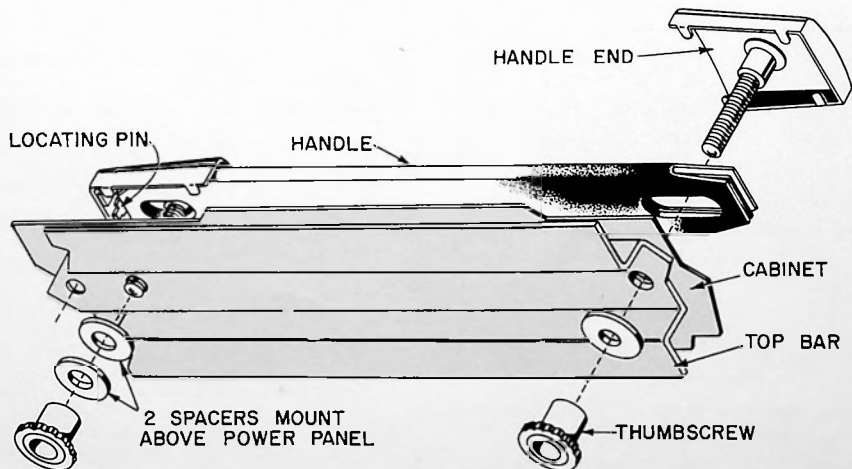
B. DETAIL OF HANDLE ASSEMBLY
